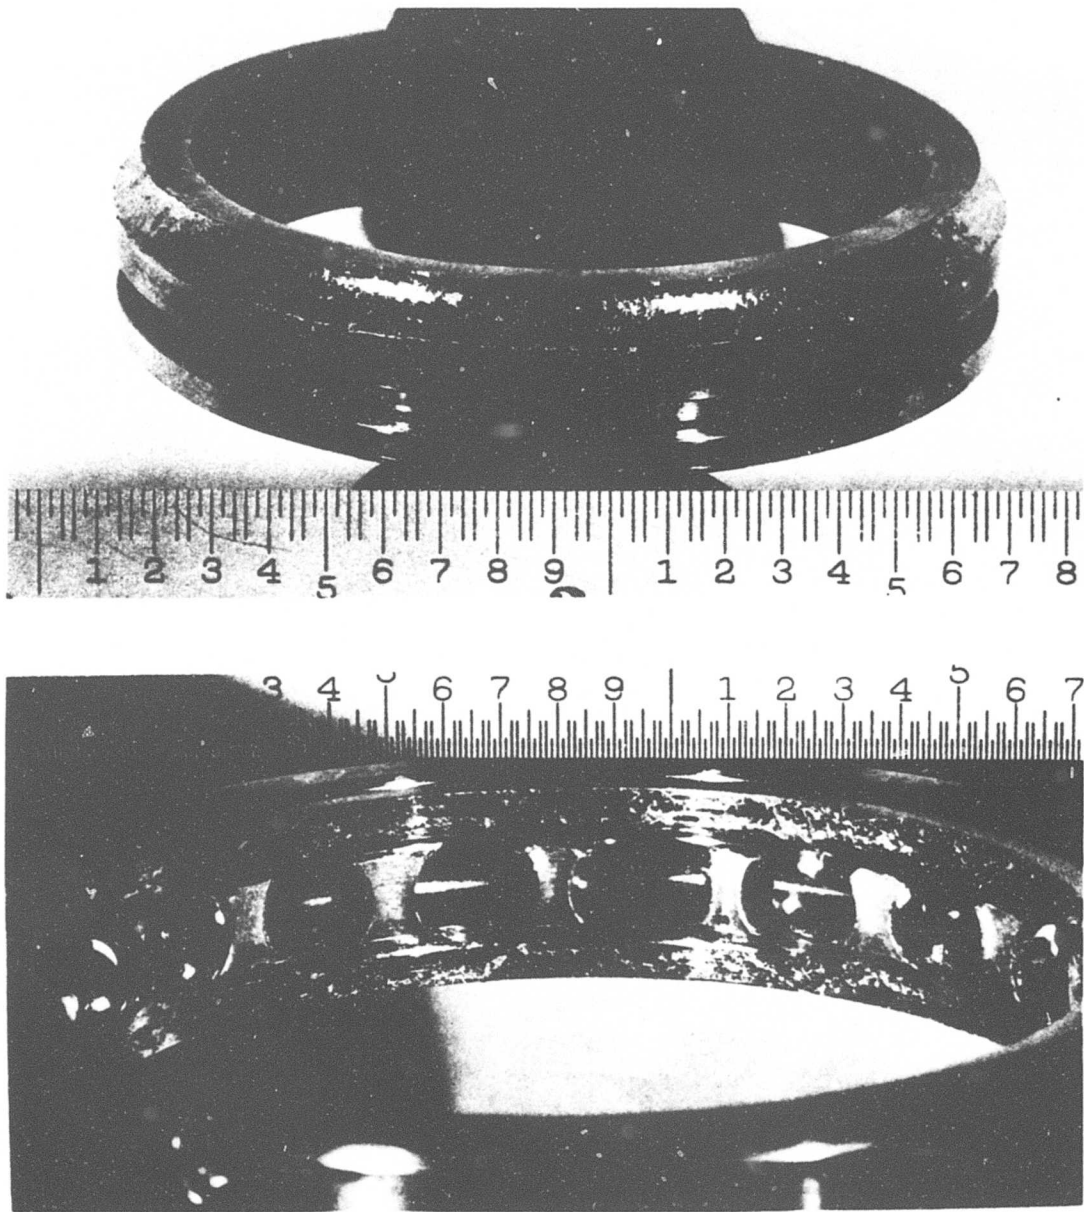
Typical Inner Ring Surface Fatigue Failure and Cage Distress on M-50 Control Bearing, With Bearing in Original Configuration
